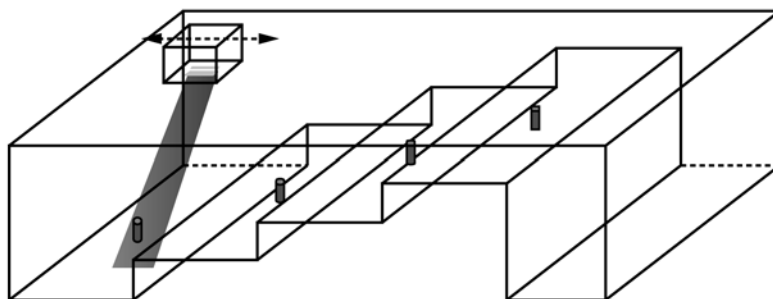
Scanning End-Drilled Holes to Obtain Beam Dimensions in Passive Plane
